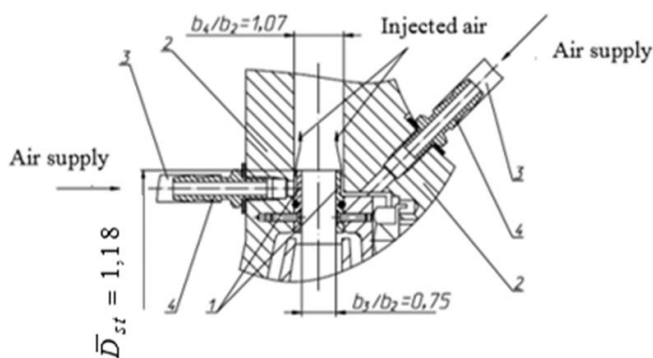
Sketch of the diffuser construction with injection: 1 – nozzle apparatus; 2 – diffuser disk; 3 – pipe; 4 – fitting
